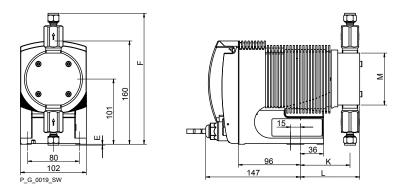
Dimension drawing gamma/ L, material version SST - dimensions in mm
